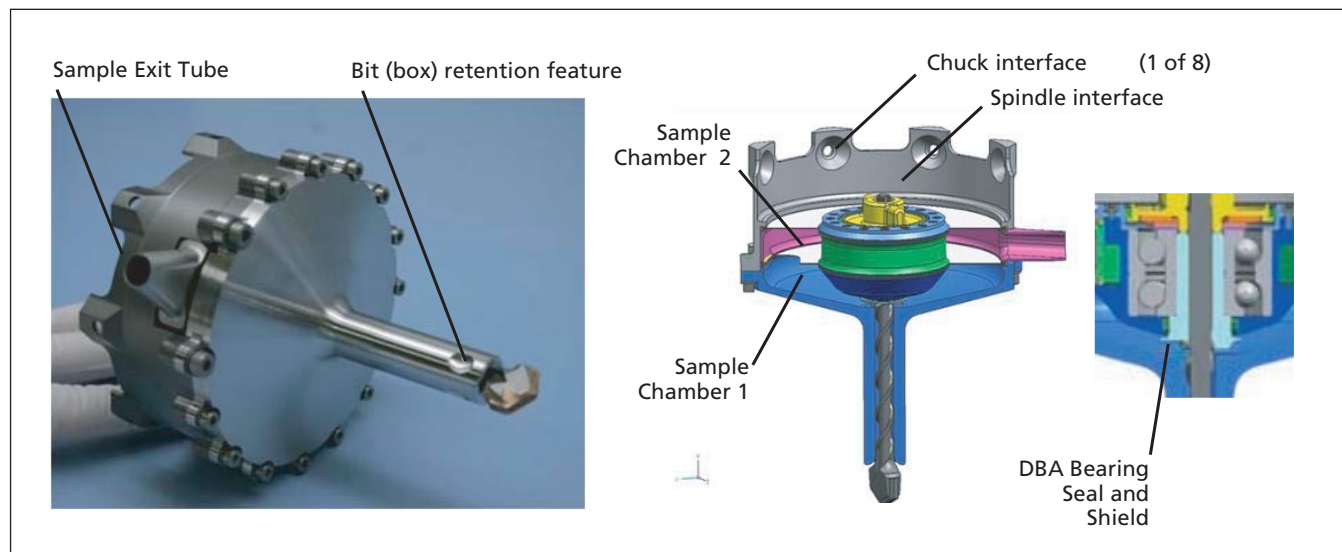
The Drill Bit Assembly (left) and Sample Paths and Interfaces (right) for the DBA.
